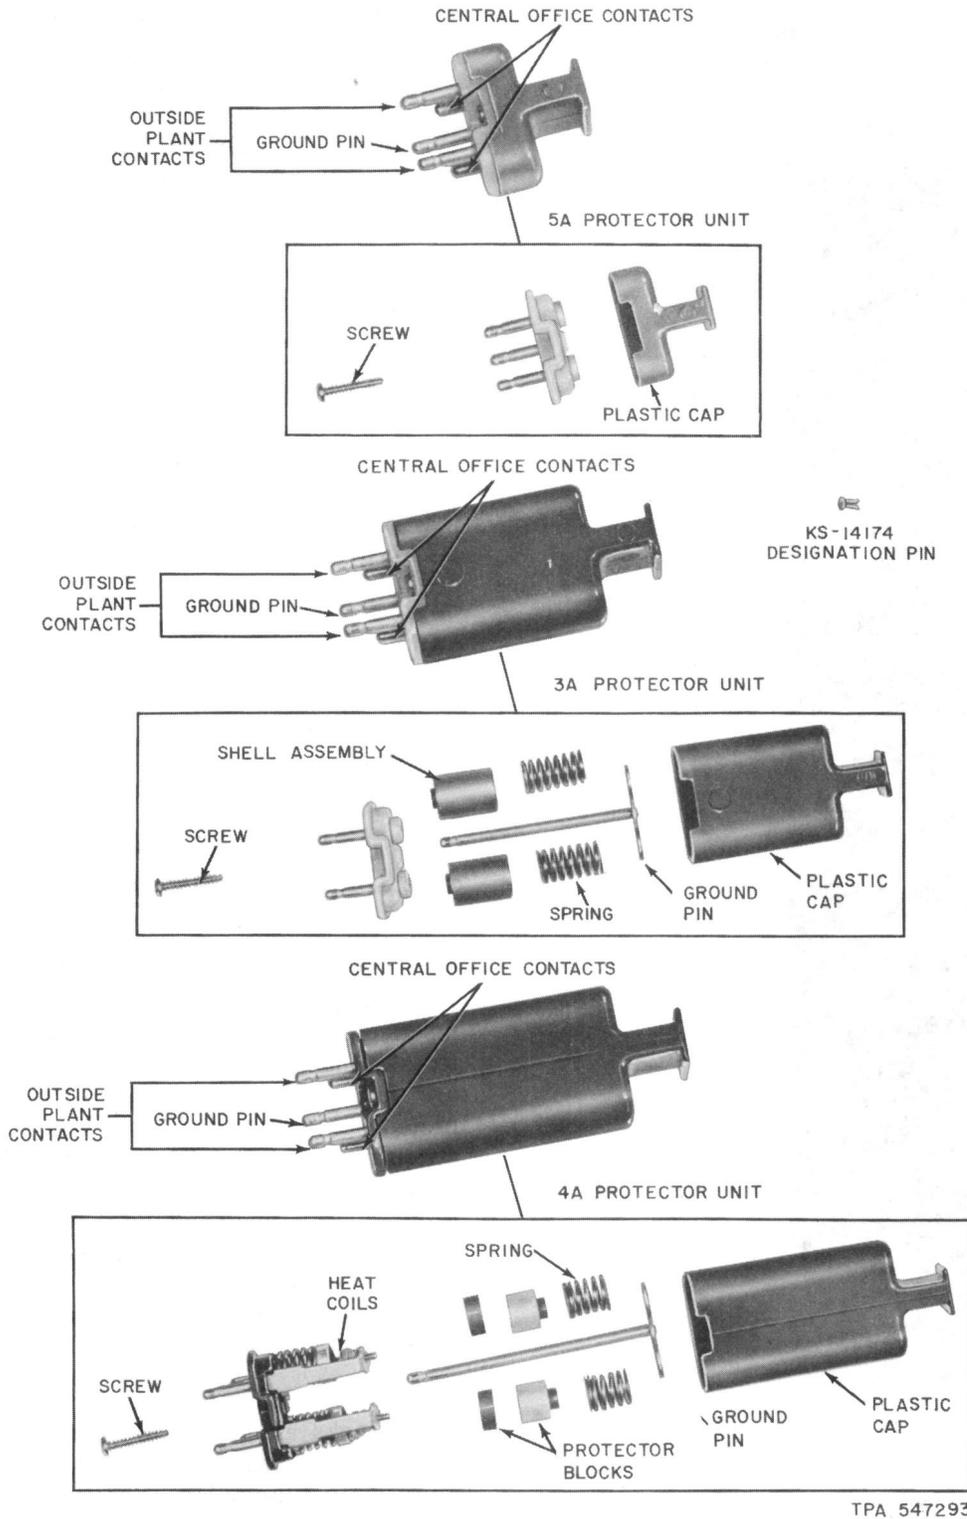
Protector Units and Designation Pin (for 302-Type Connector)
